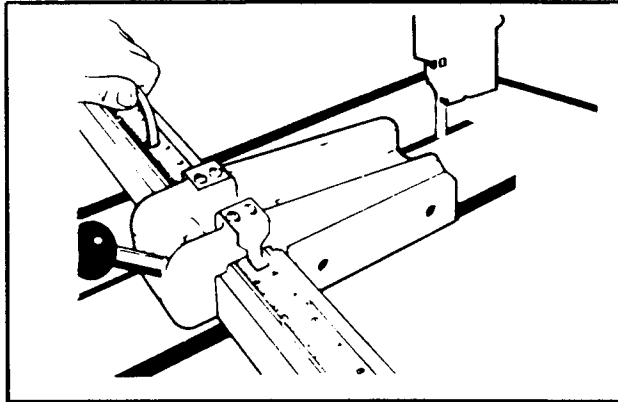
UNIVERSAL CALIBRATED WORK FIXTURE SET UP FOR STRAIGHT CUT-OFF.
